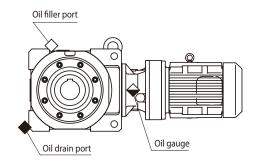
Locations of Oil Filler Port and Oil Drain Port (Example: Bevel BUDDYBOX 4 Series LHYM-Y1)
